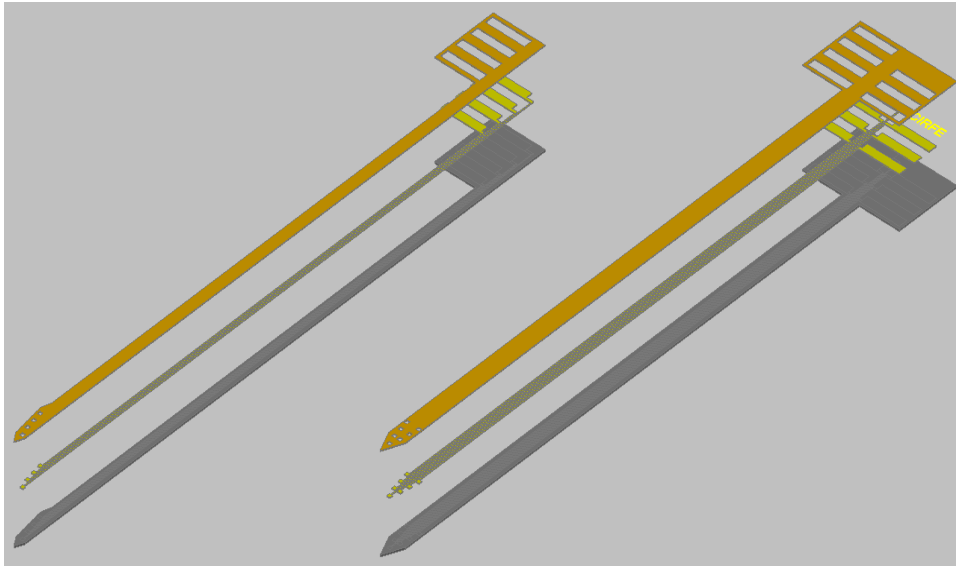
Exploded assembly of simple recording electrodes, Left: Layout A, Right: Layout B
